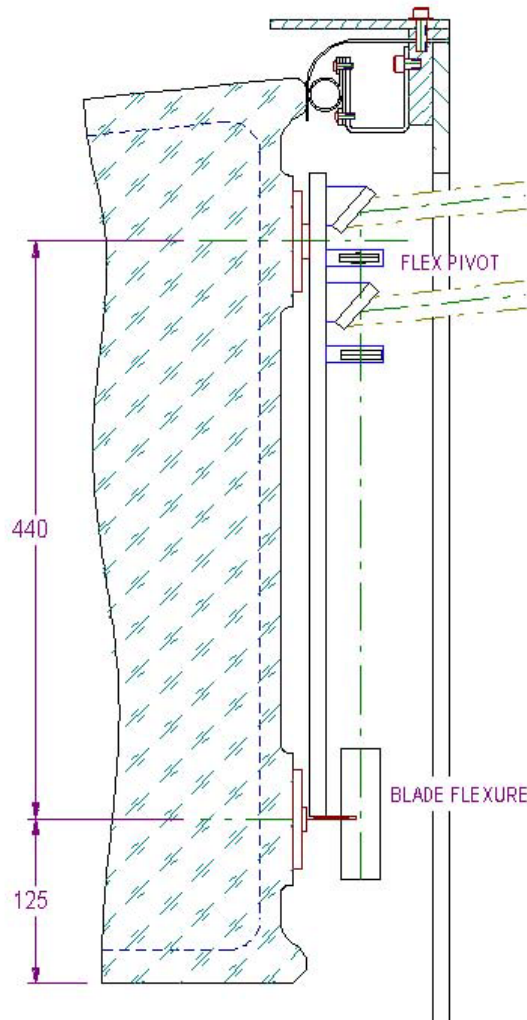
Schematic cross-section of an edge sensor mounted on a primary mirror segment.
